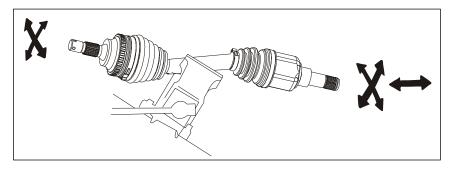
Inspect Drive Shaft Universal Joint
